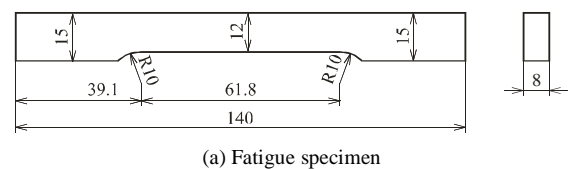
Shape and size of specimen and contact pad (Dimensions are in mm).
